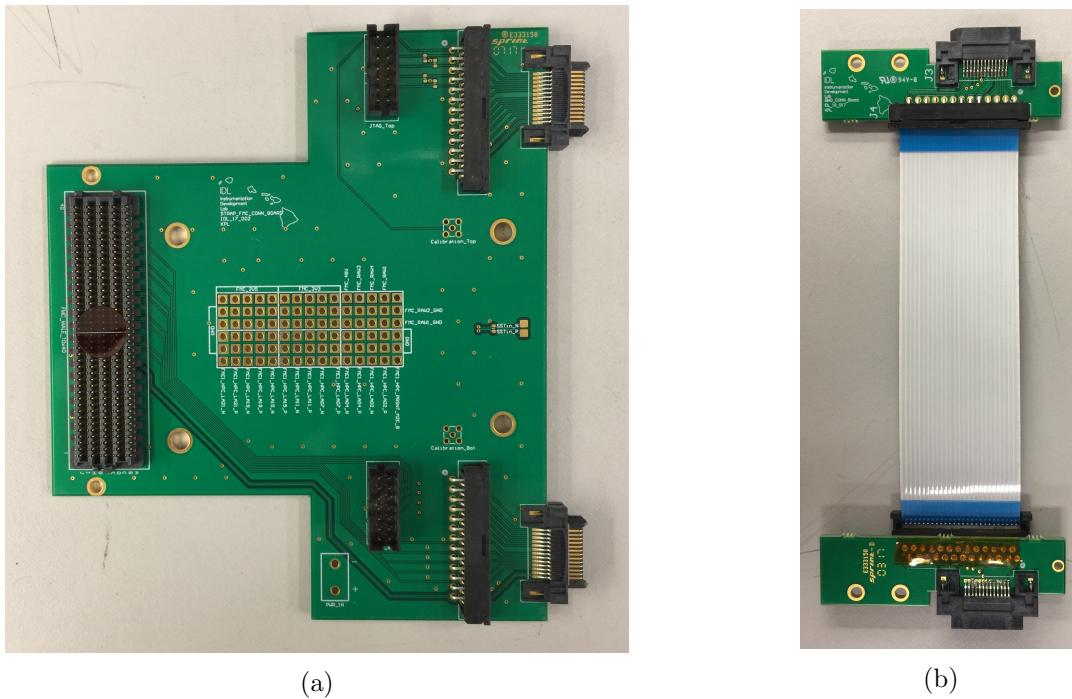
(a) Photograph of interconnect board designed to link the SCROD and Next Gen BMD DC around the HMB tracker frame and (b) interconnect board designed to link DCs together in a serial chain.
